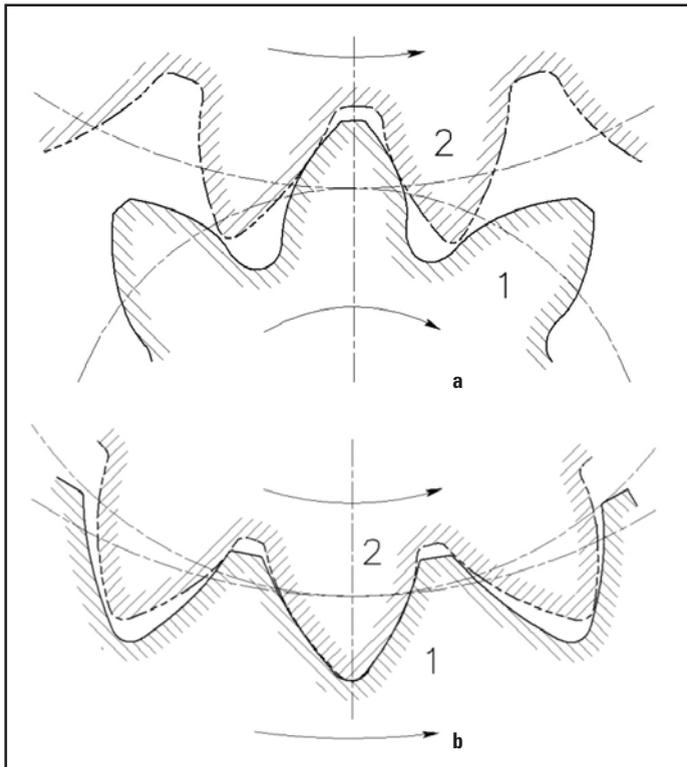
Generating of external (a) and internal (b) gears: 1) gear profile; 2) shaper cutter profile.
